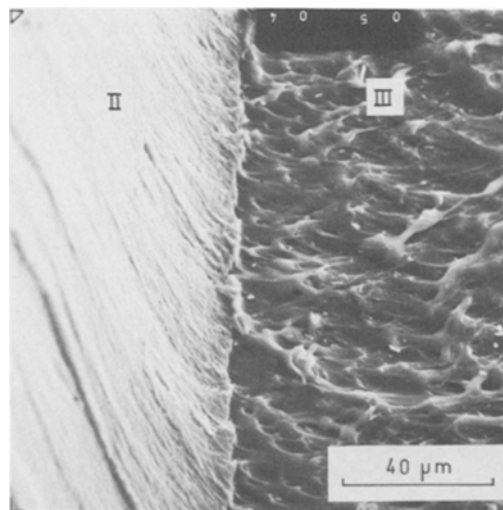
Zones II and III on the fracture surface of a test piece.
